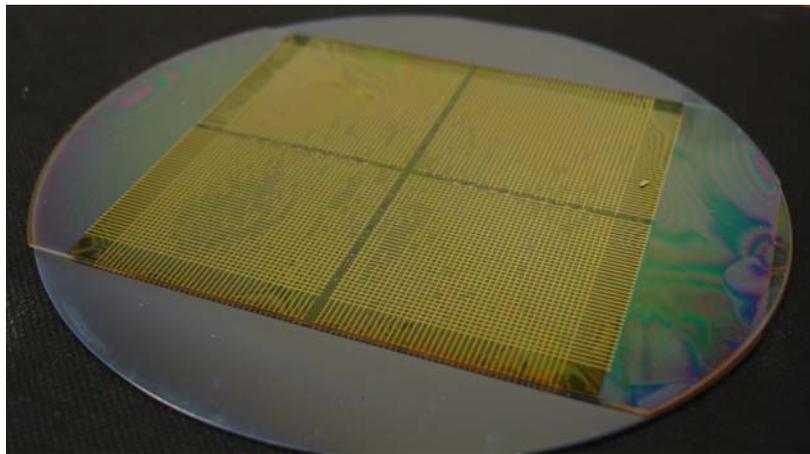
Wafer bonded with BCB and interconnected using 80Au/20Sn solder bumps
